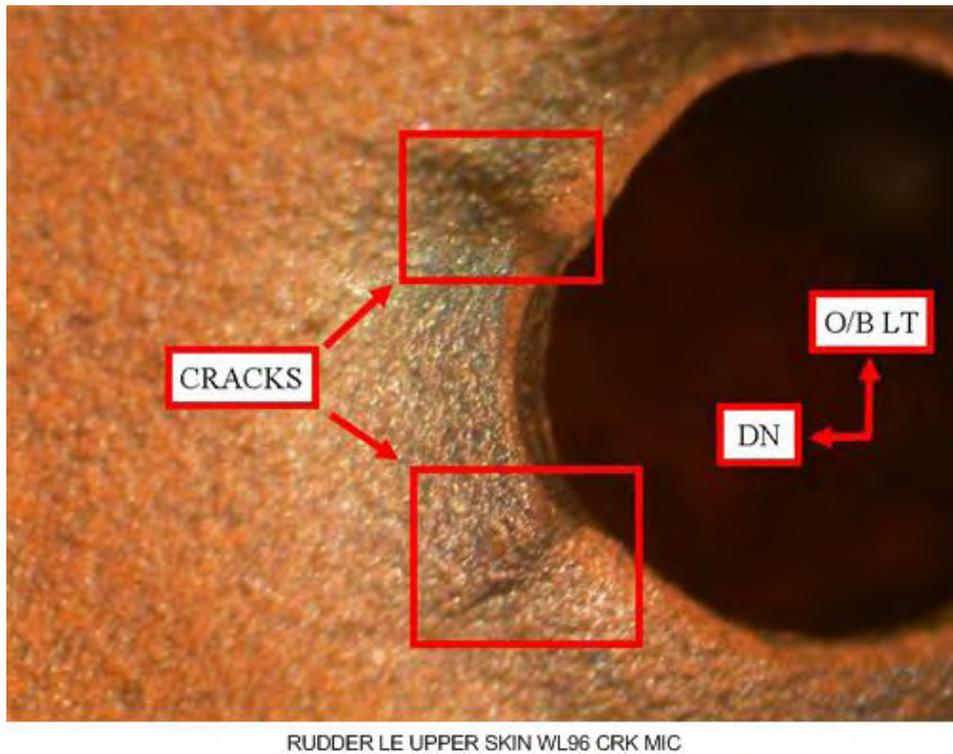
Microscopic View of Cracks on the Rudder Leading-Edge Upper Skin WL 96
